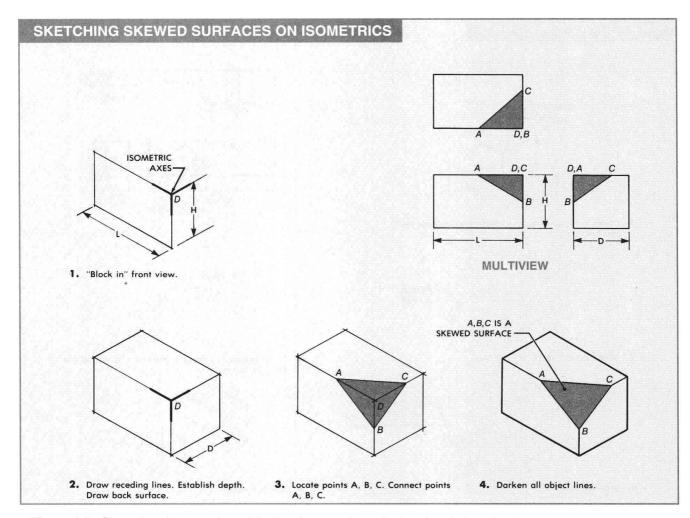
Skewed surfaces on isometric sketches are drawn by locating their end points.
